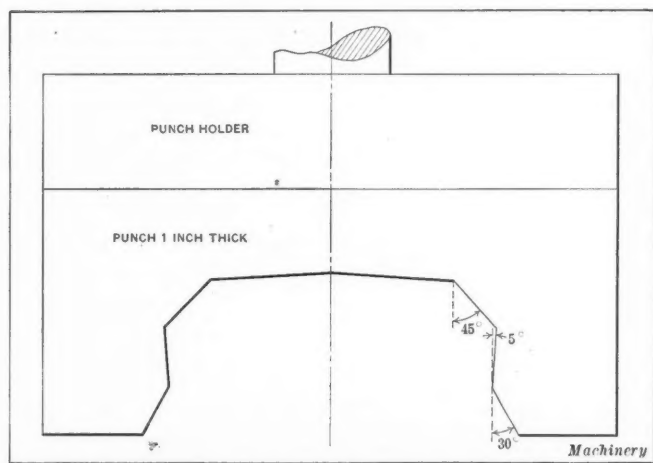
Trimming Punch used in conjunction with Fixture shown in Fig. 7
